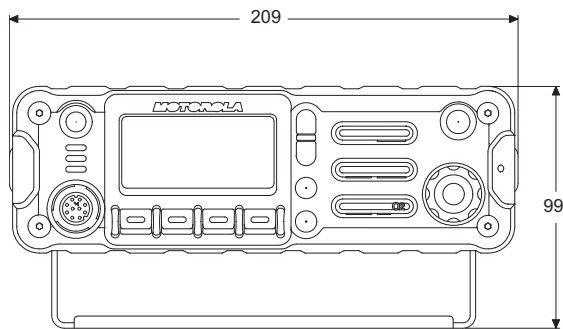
Front View of O2 Control Head with Remote Mount and Trunnion
